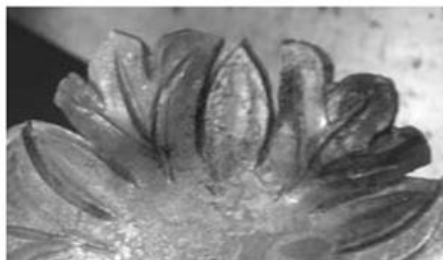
THE LARGER PEDALS BULGED OUT USING A BALL PUNCH AND WOODEN BLOCK
